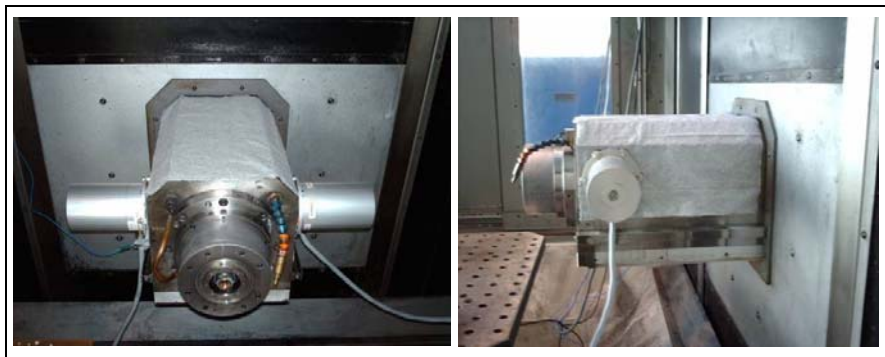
ADDs placed on the ram of a milling machine, by Fatronik[®]
